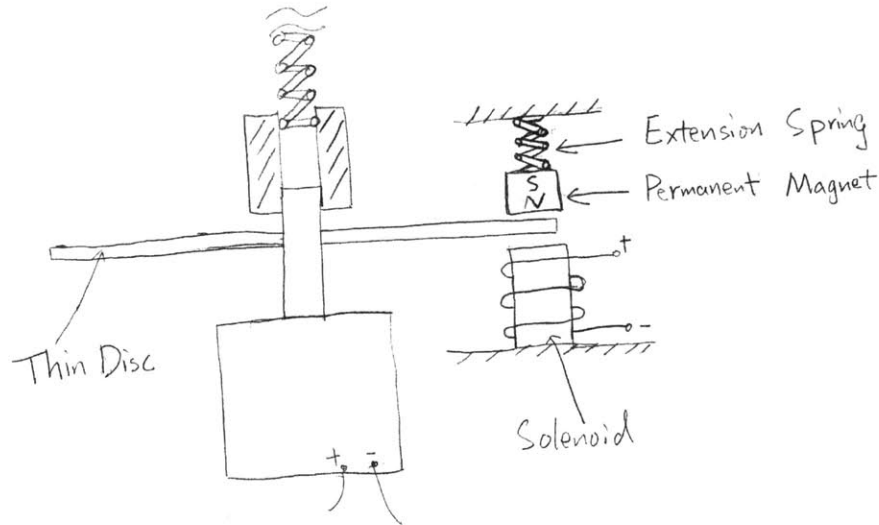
Latch by friction. A non-magnetic flywheel is attached to the driver motor shaft. A solenoid and a permanent magnet attached with an extension spring form the latch and release mechanism.
